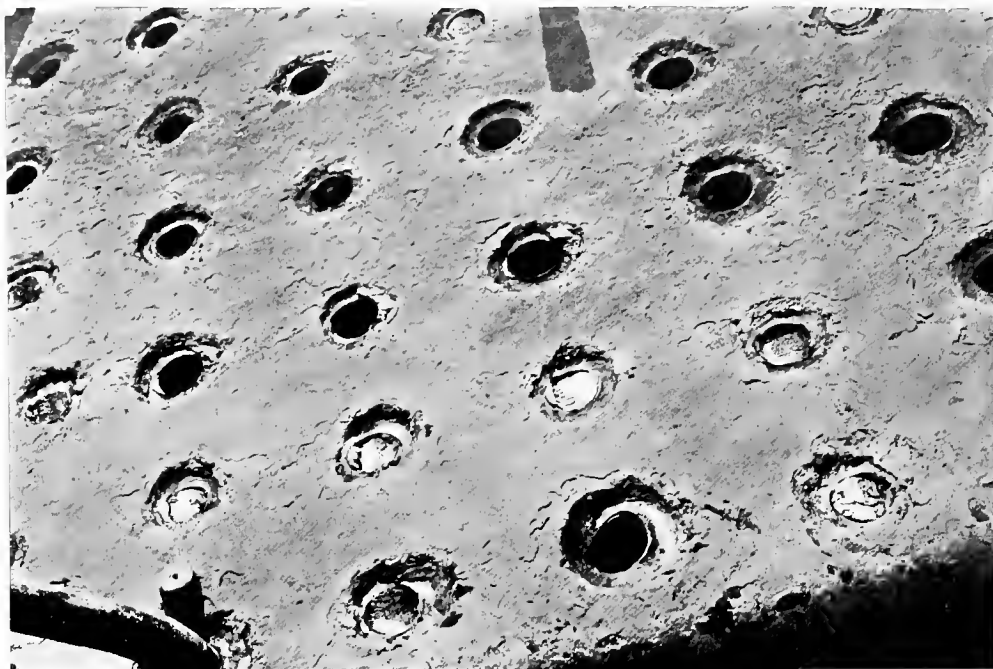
Crown-sheet showing the corrosion at the points where the bolts pass through it. This box was removed on account of the corrosion of the crown-sheet.
